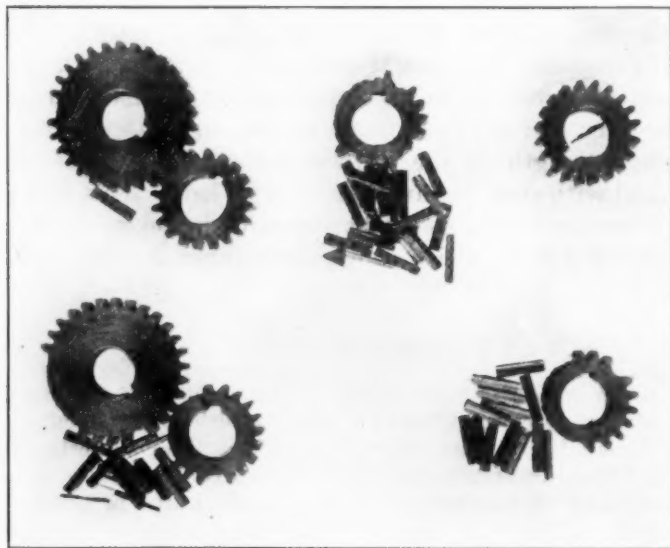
20 TOOTH ENGAGING 30 TOOTH, TESTS 04—08 INCLUSIVE, SERIES 1
